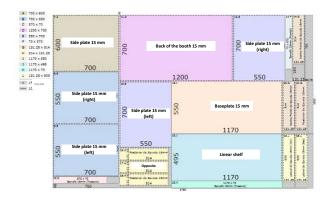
Example of a cutting plan. Search: 3Dcademy, 2016
